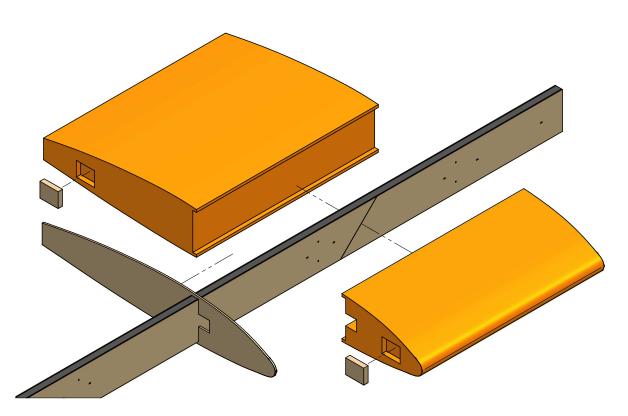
Assembly of the foam parts and root ribs of the central wing section
